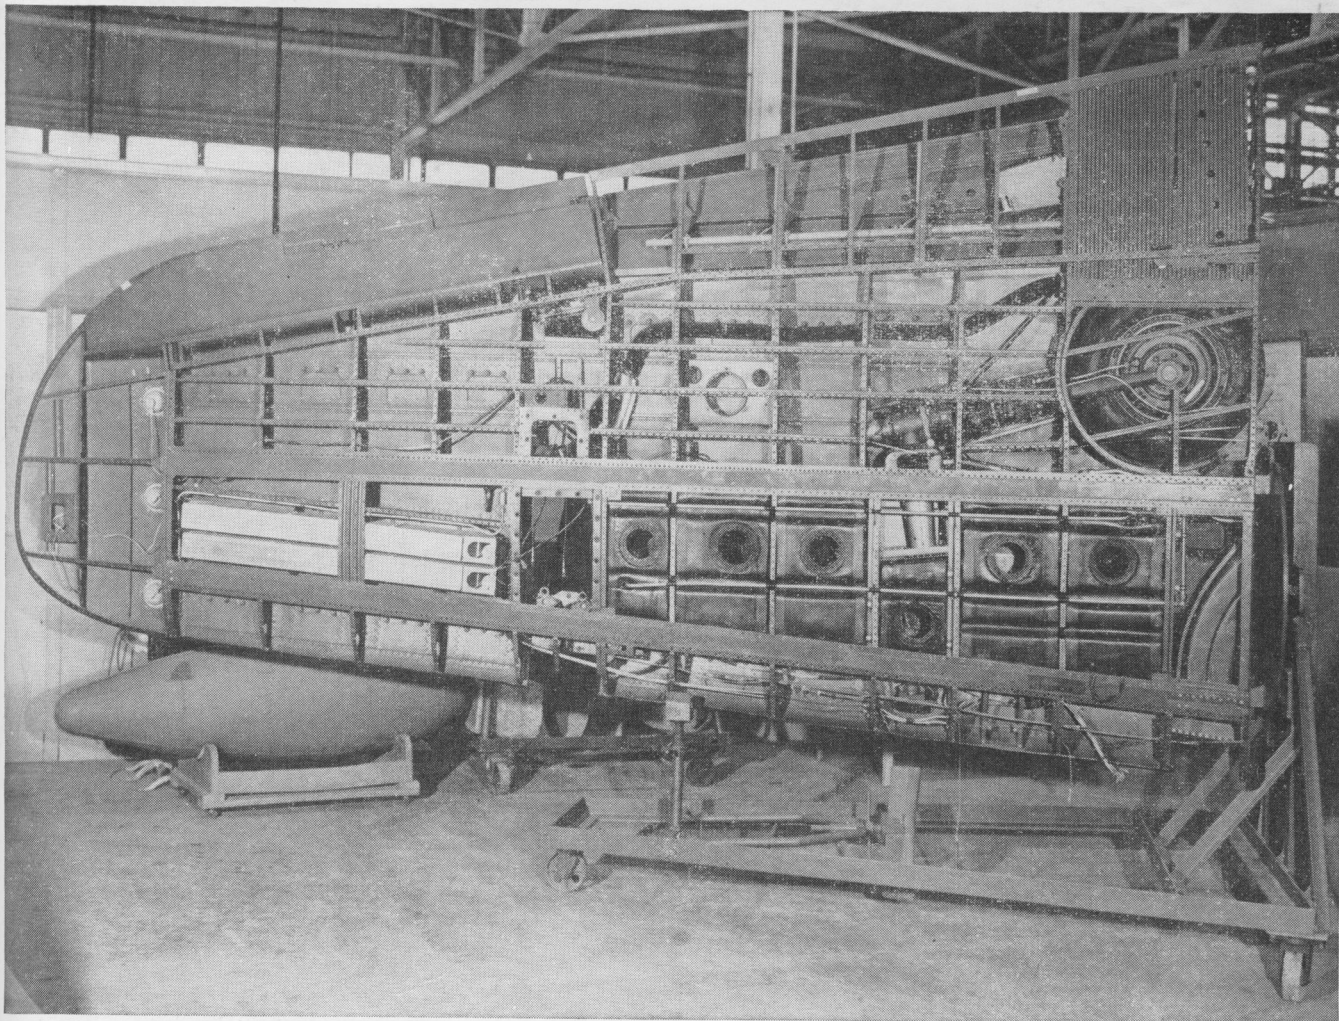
Outer wing panel with the top skin off to show self-sealing fuel tanks, wing-gun ammunition boxes, retracted main landing wheel, and machine-gun heater tube. Note the push-pull rod for actuating the landing flap.
